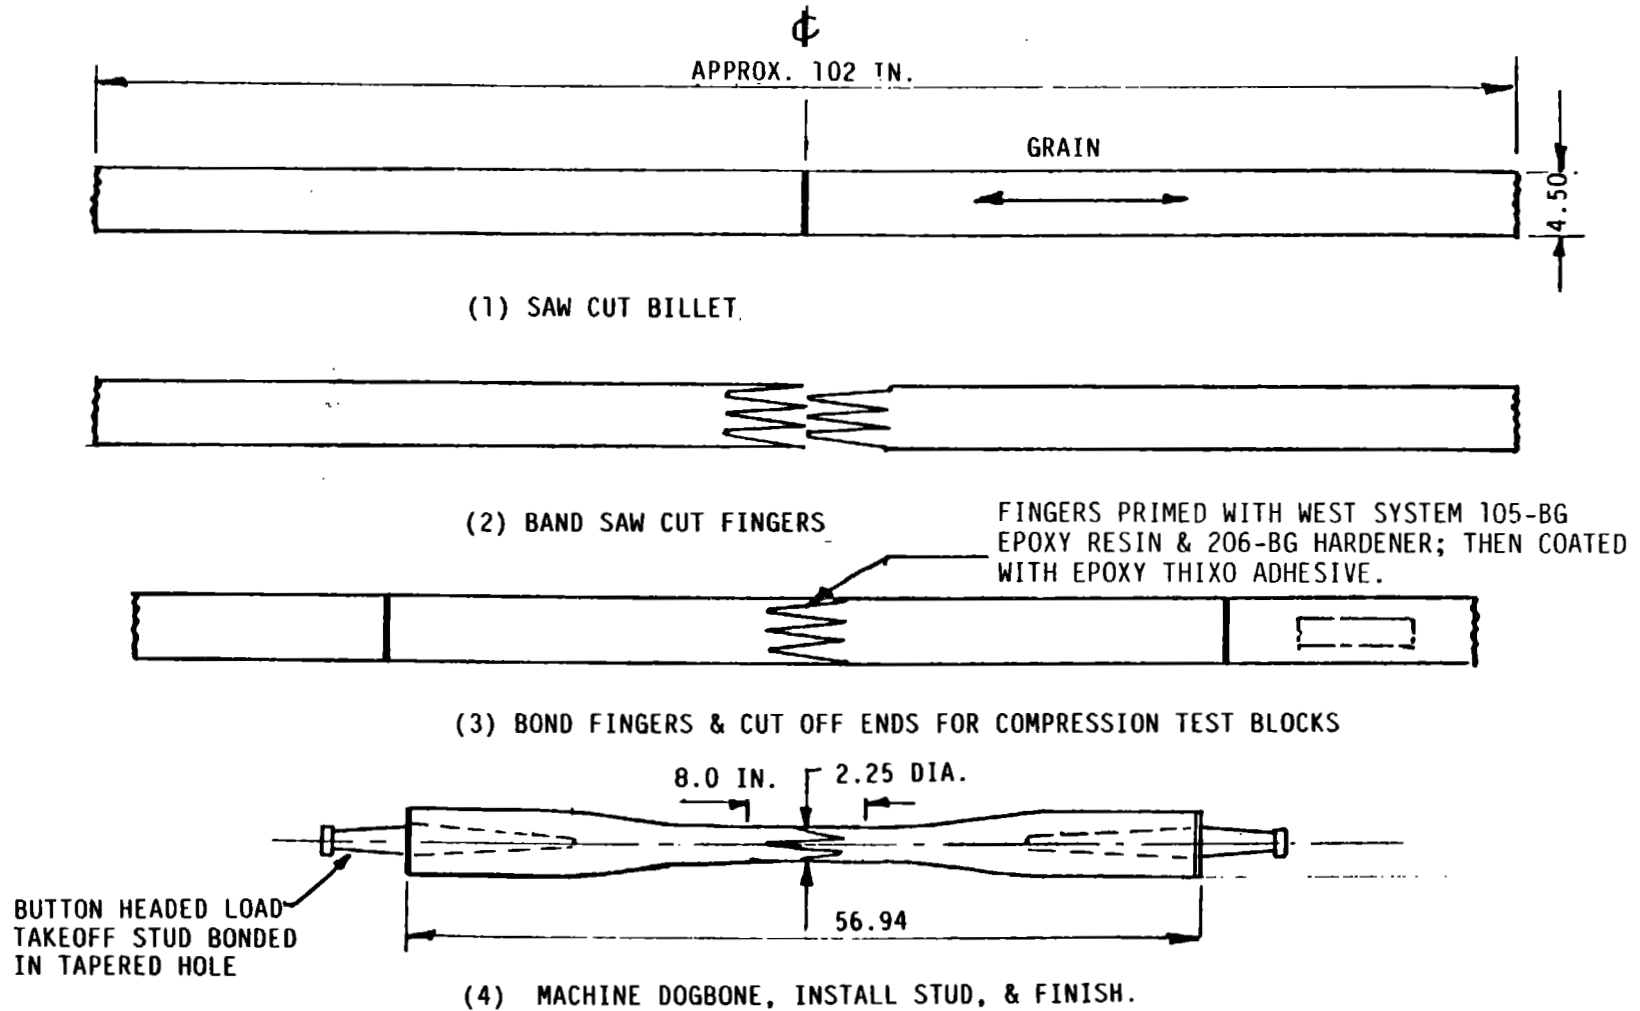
Fabrication of Finger Joint, Dogbone Specimens for Fatigue Tests
